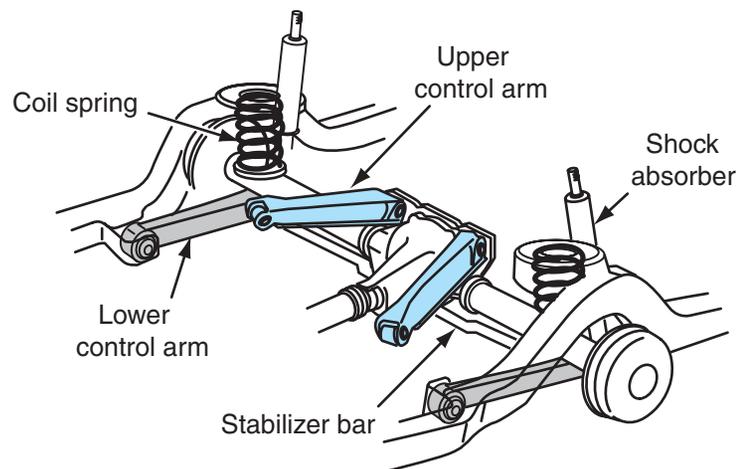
Hotchkiss drive with a coil spring suspension.
